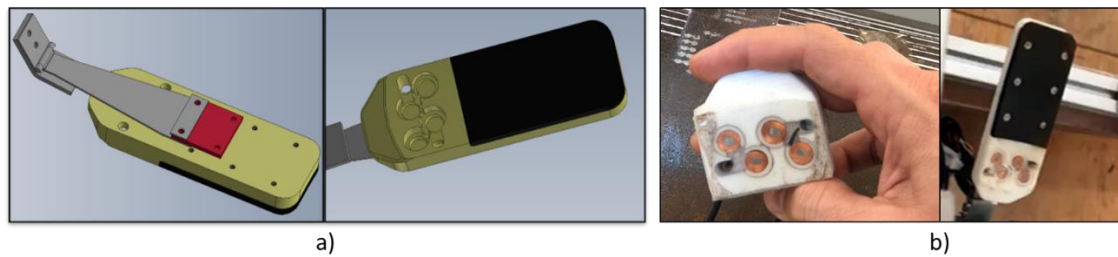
23: In a) design of the EC probe to be used in the prototype and in b) probe assembled to be used in the prototype.
